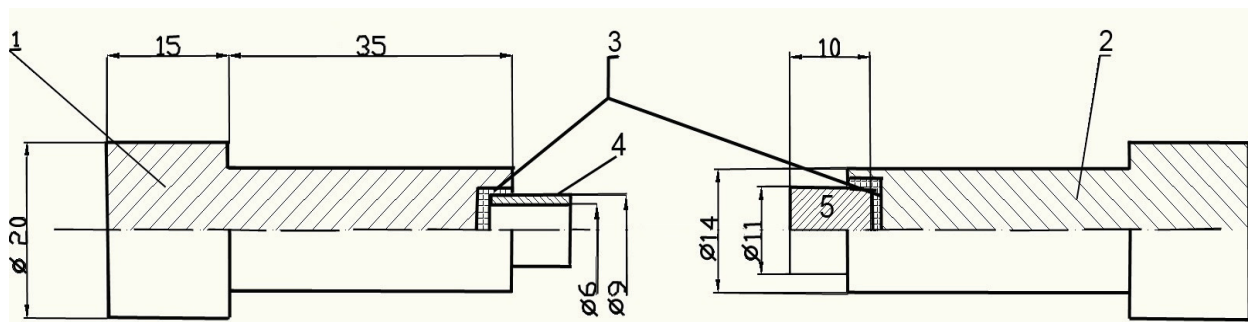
Diagrammatic representation of specimens: 1, 2 – holders, 3 – solder, 4 – movable specimen, 5 – fixed specimen
